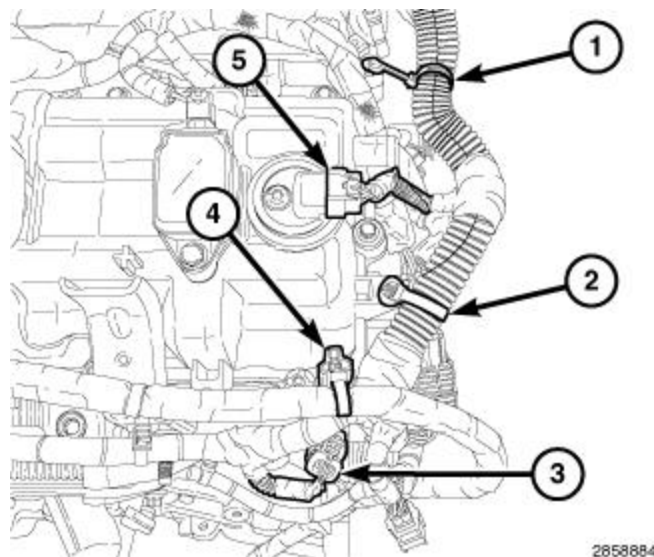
ECT Sensor Connector, CMP Sensor & Main Wire Harness Retainers
